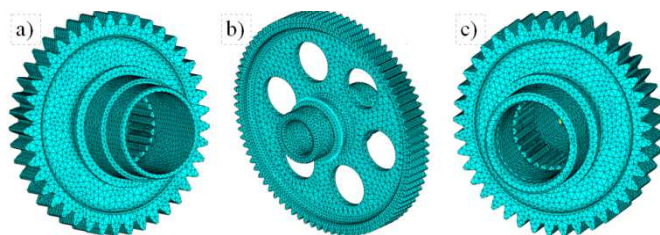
A geometrical model of the body of reduction gear (a, b, c)
